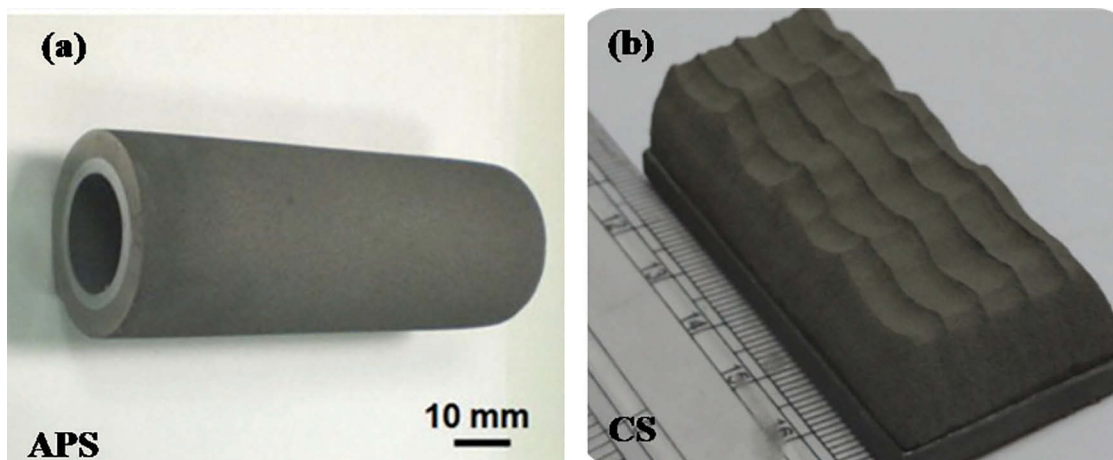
(a) Plasma-sprayed Al-Si-10CNT coating of 5 mm thick and (b) Ti coating of 10 mm thick deposited by cold spray technique
